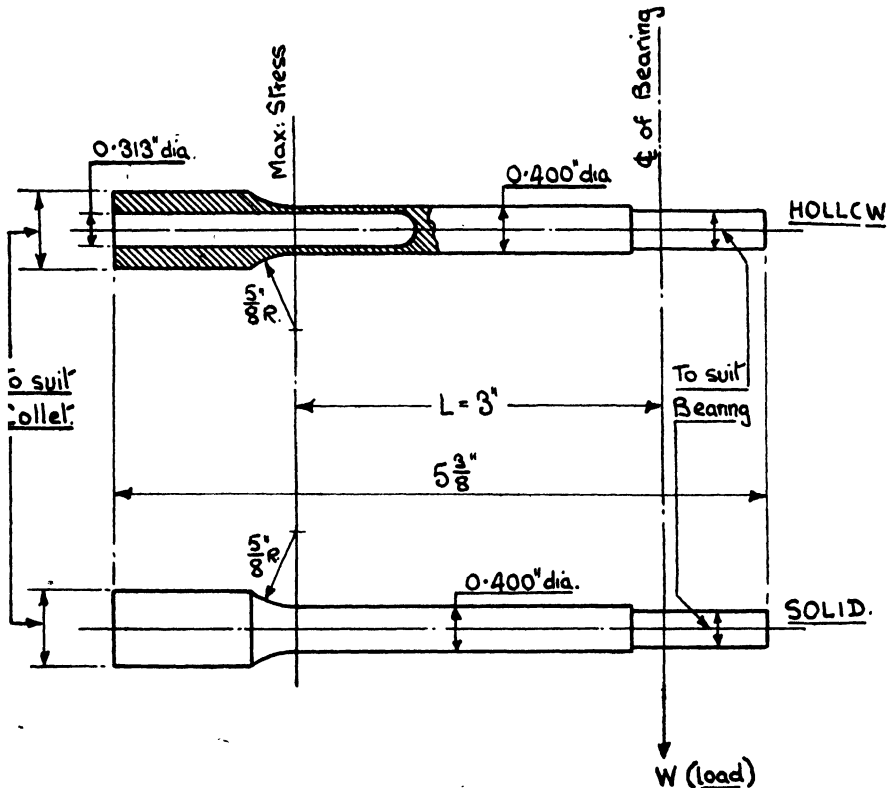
HOLLOW AND SOLID WOHLER TEST PIECES
